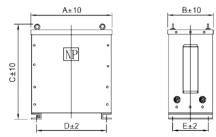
Drawing A (Standard Type: 1, 2, 3 & 5 kVA)
